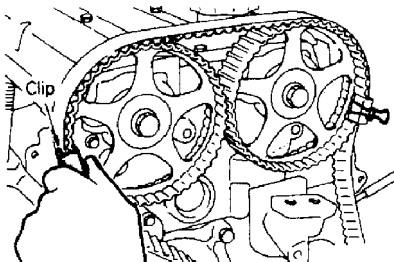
Clipping Timing Belt to Intake Camshaft Sprocket
